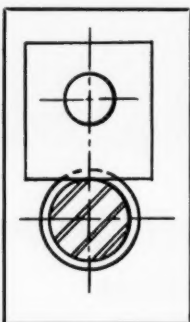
This sketch shows how a small thin piece of sheet steel, riveted to the inside of the sheet steel door, prevents the screw from falling out when the cover is opened.
